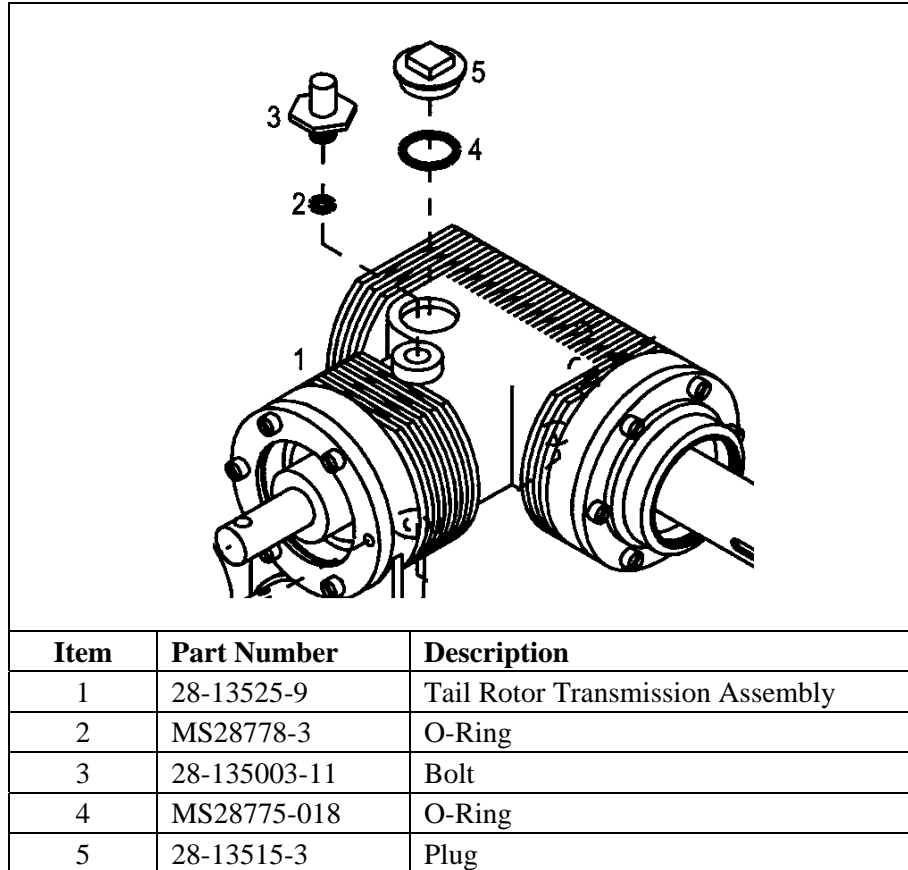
Tail Rotor Transmission Inspection Port Assembly
